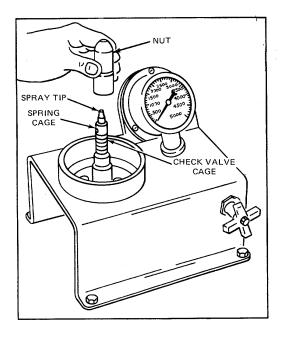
Installing Injector Valve parts on Auxiliary Tester J 22640
